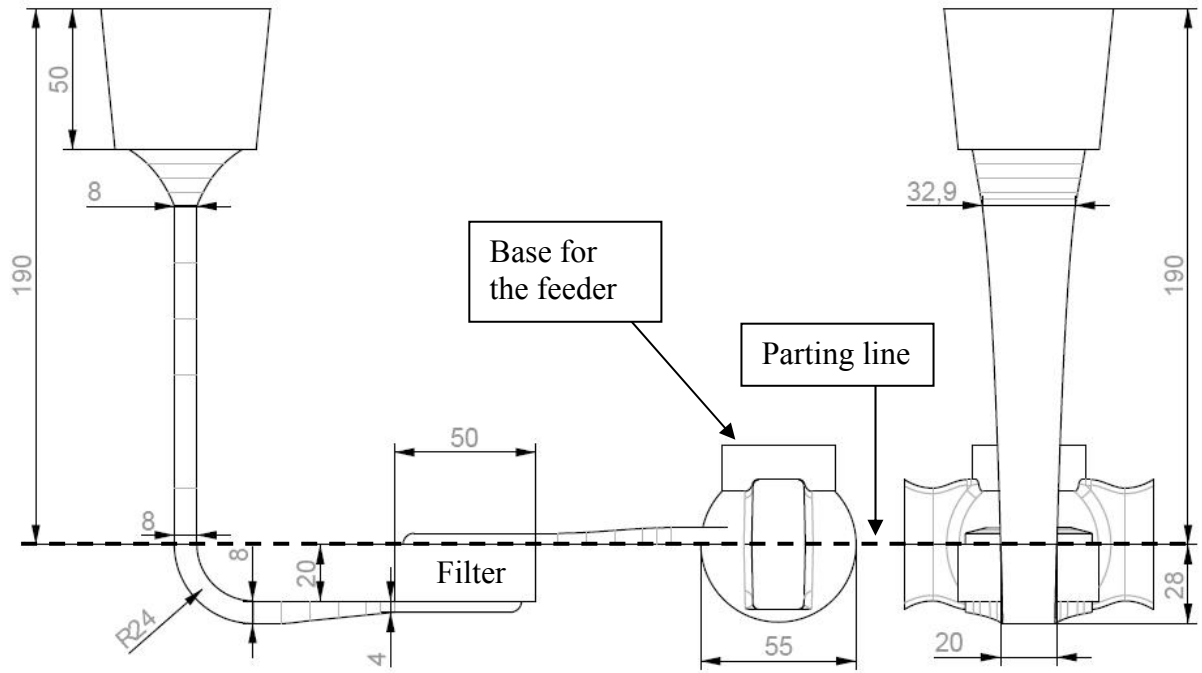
The figure show drawings and dimensions of the streamlined gating system.
